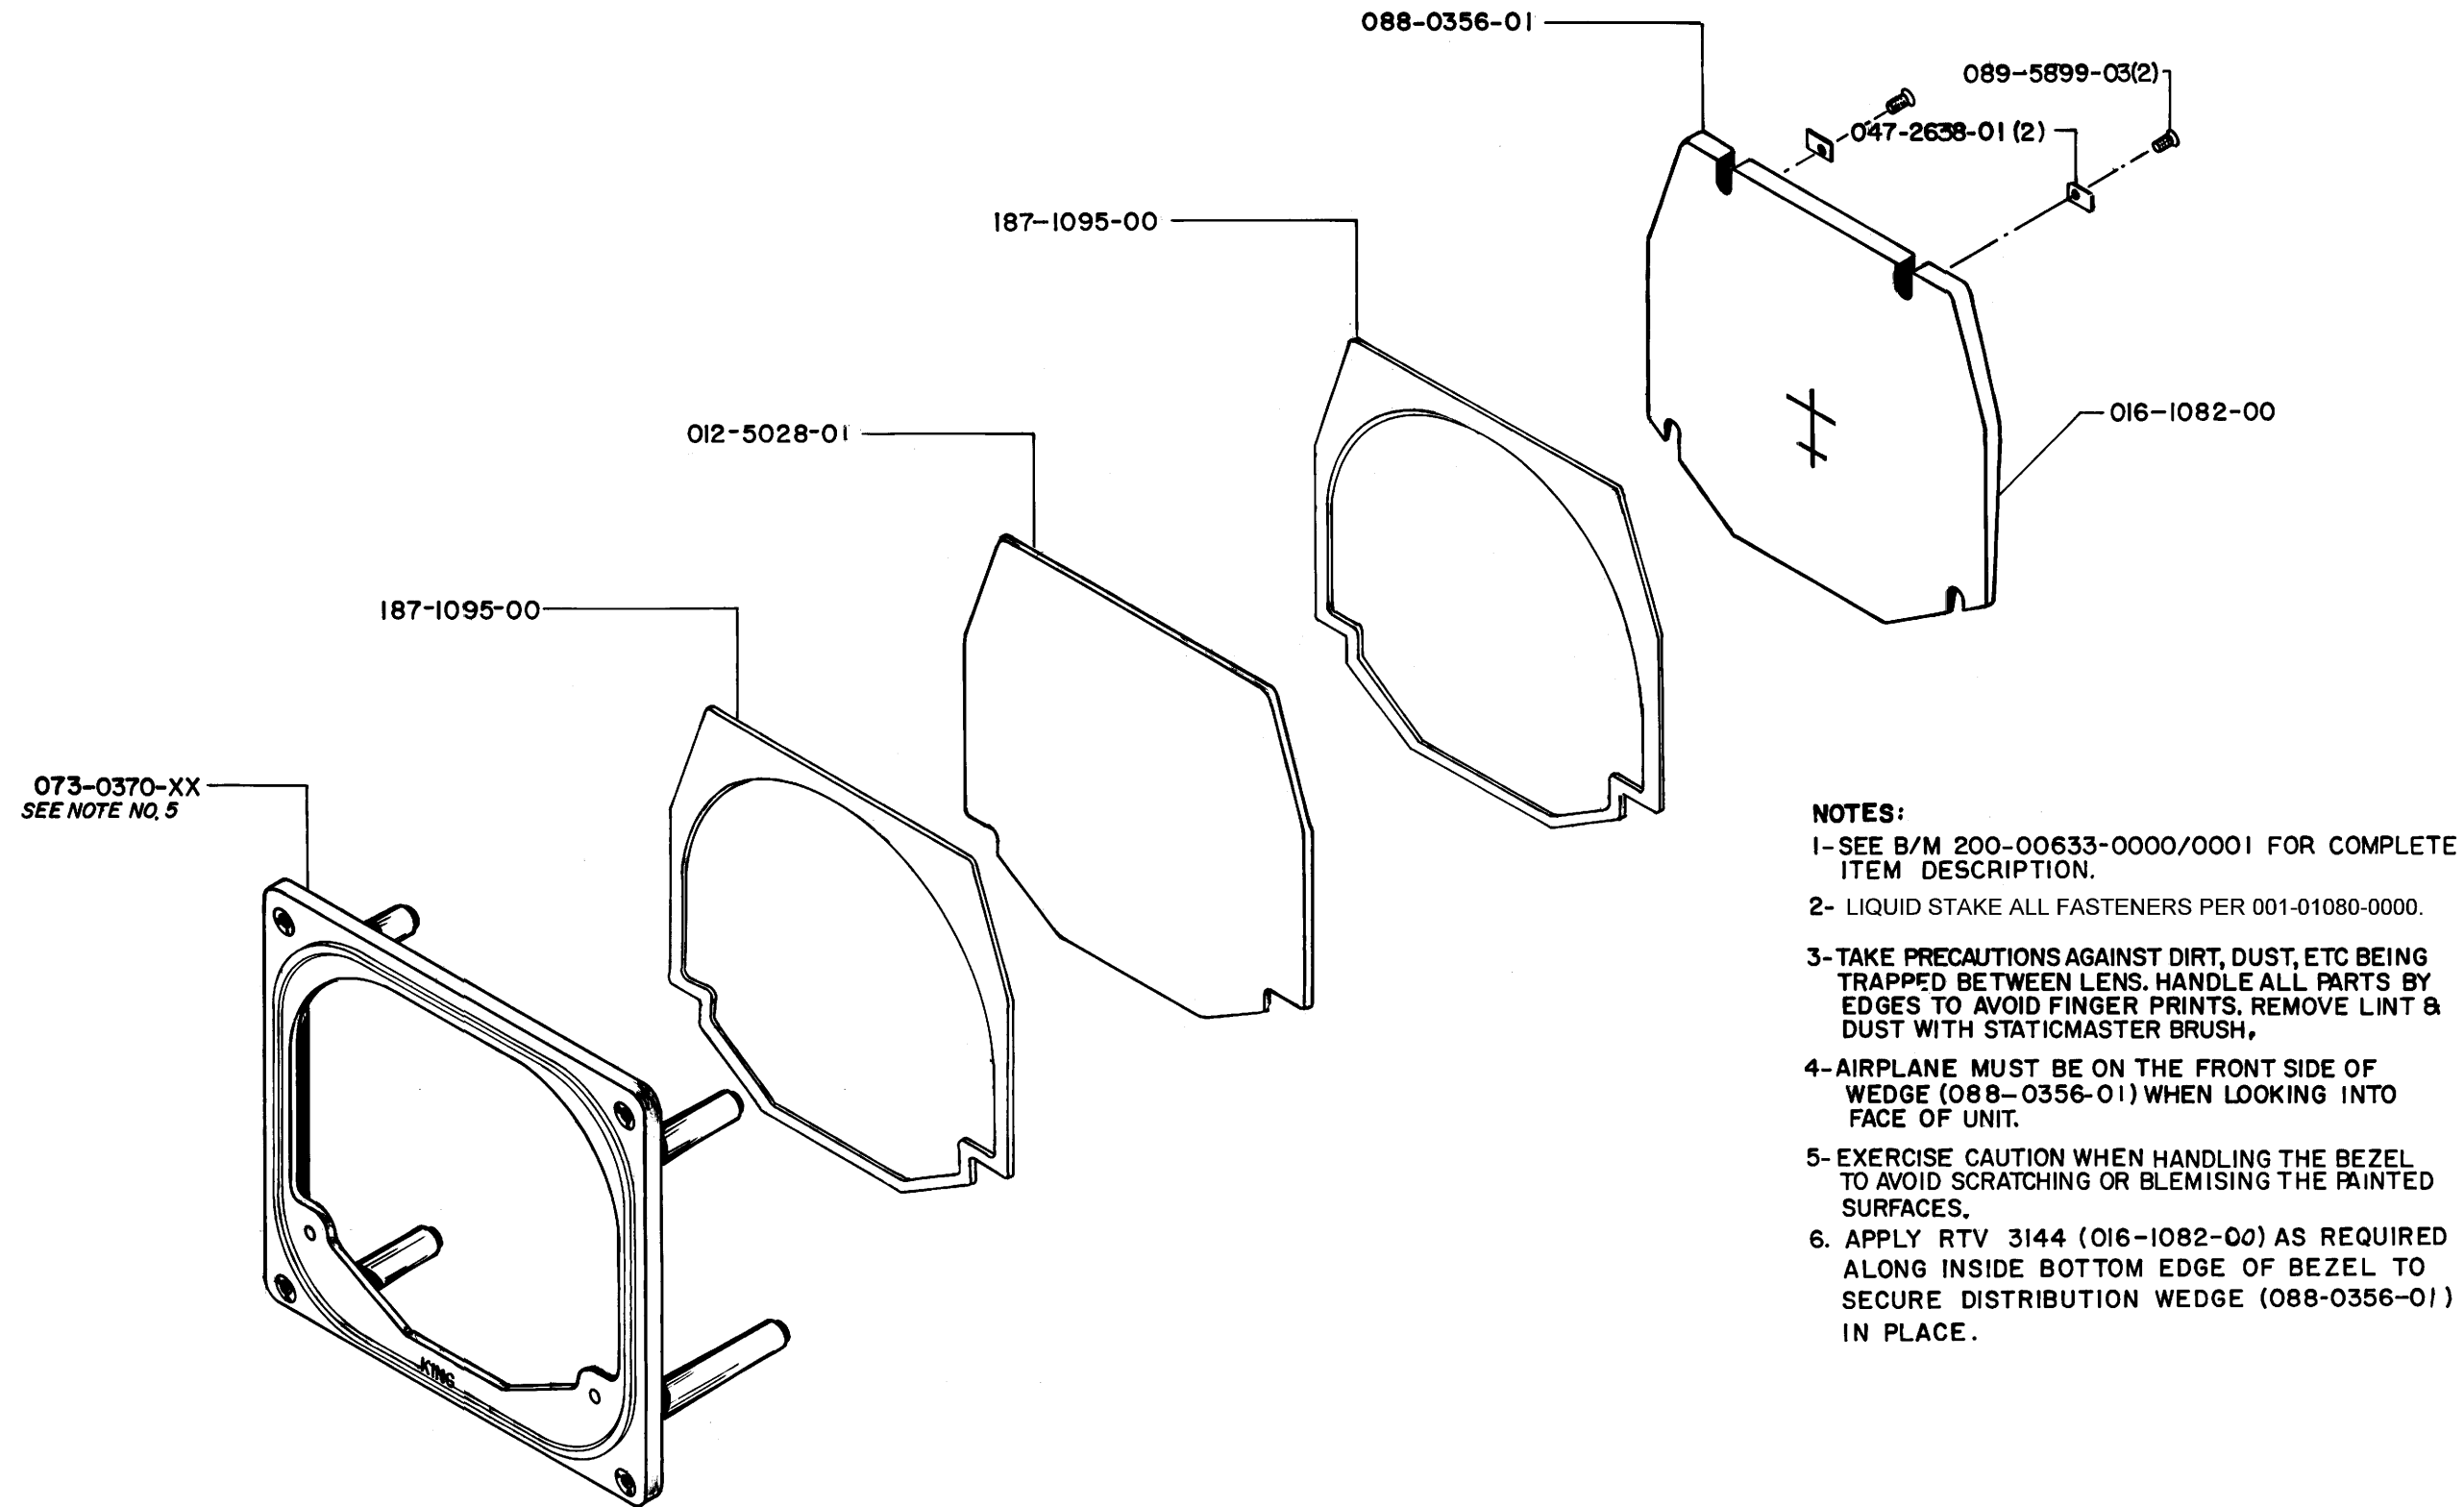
A KI 525 FINAL ASSEMBLY
